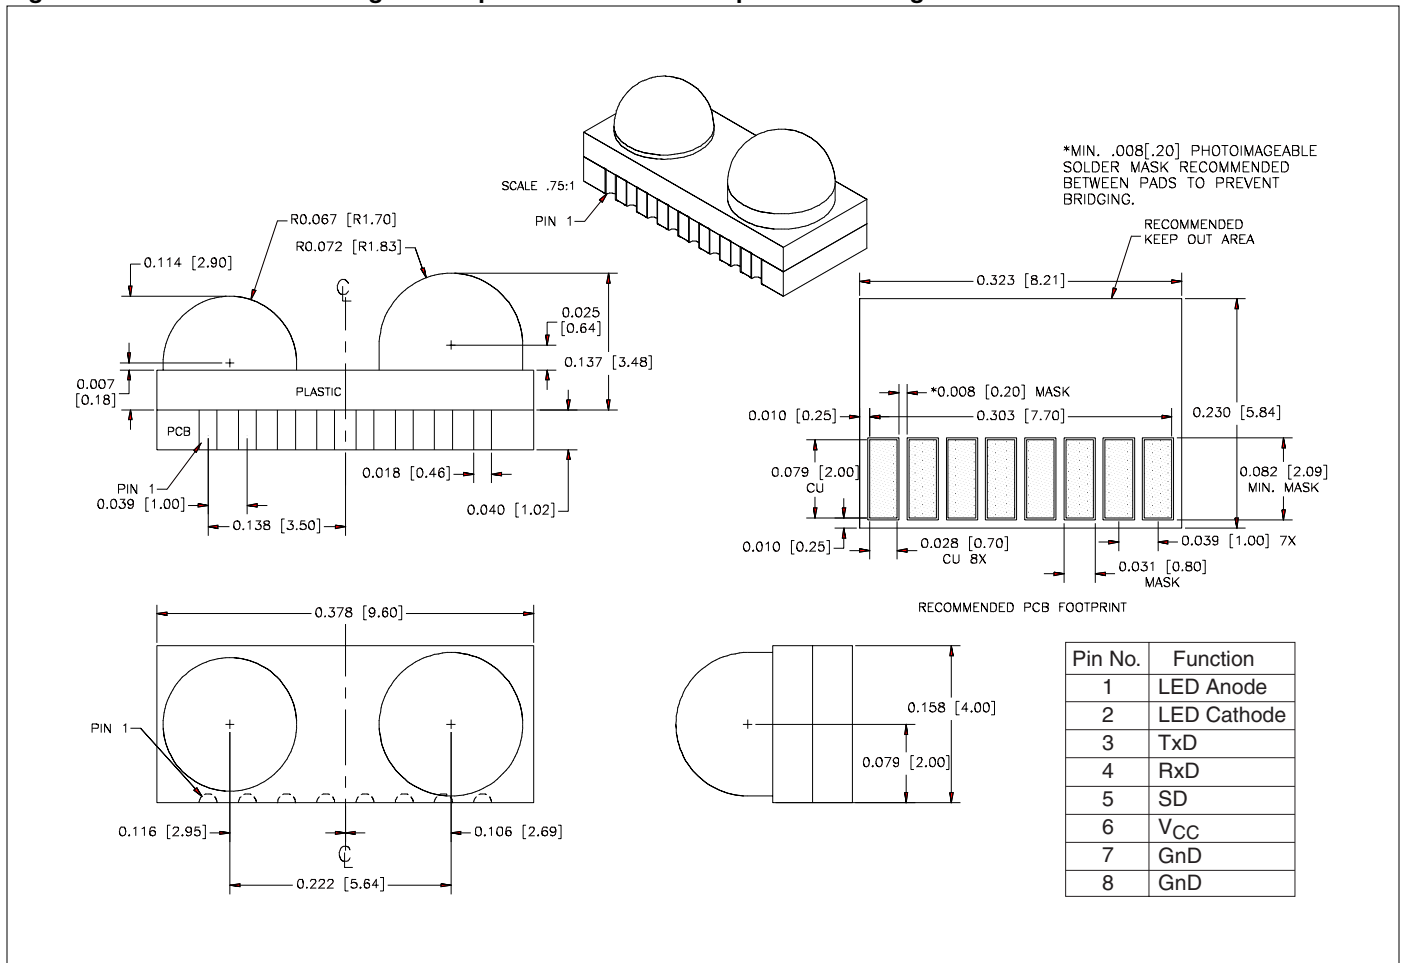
IRM1021 Detail Drawings With Optional Side View or Top View Mounting
